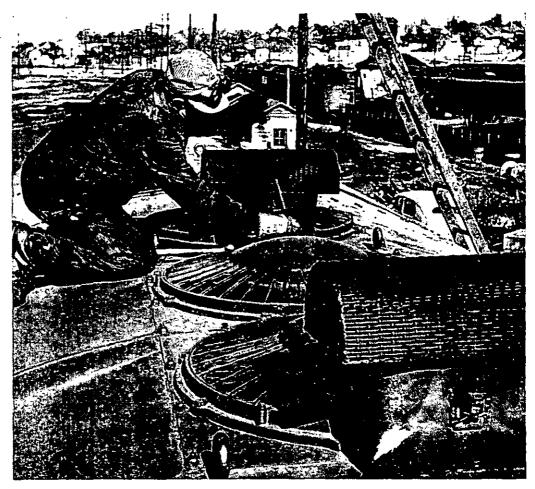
These are the latest type spark arrestors; they are bolted over diesel engine exhaust chambers.
